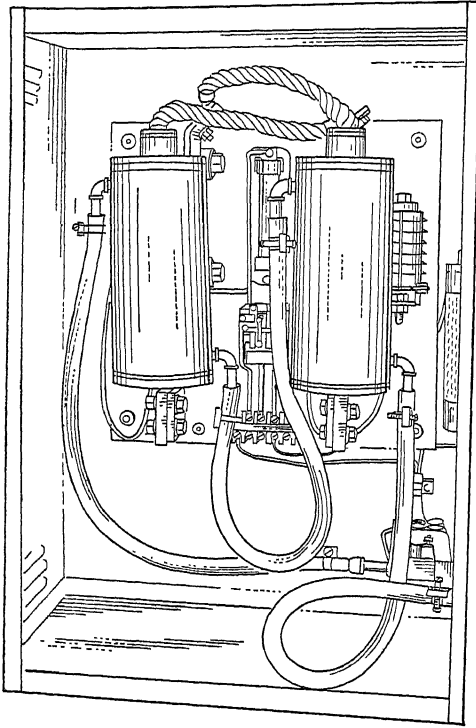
Single-phase Ignitron Contactor with Size D Tubes
